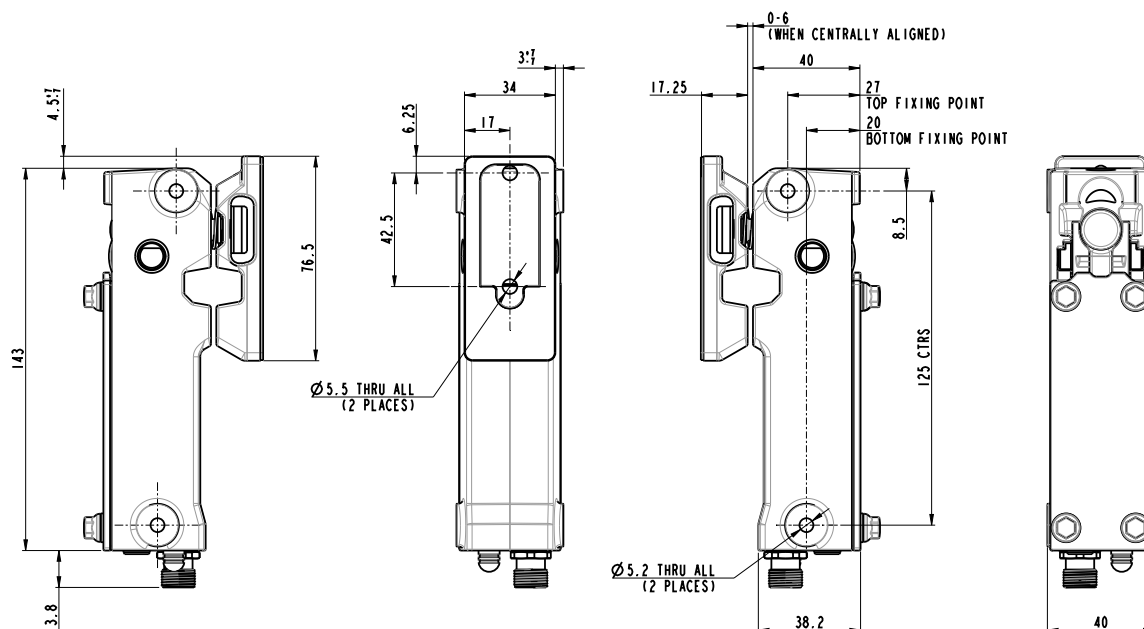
Dimensional Drawing – HGL Switch and Actuator Assembly
